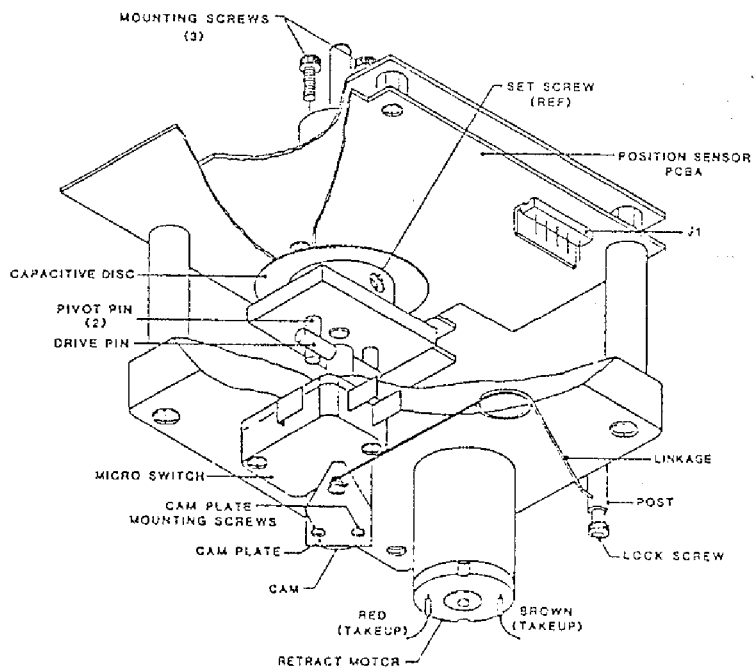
Take-up Arm Retract and Pivot Sensor Assembly
